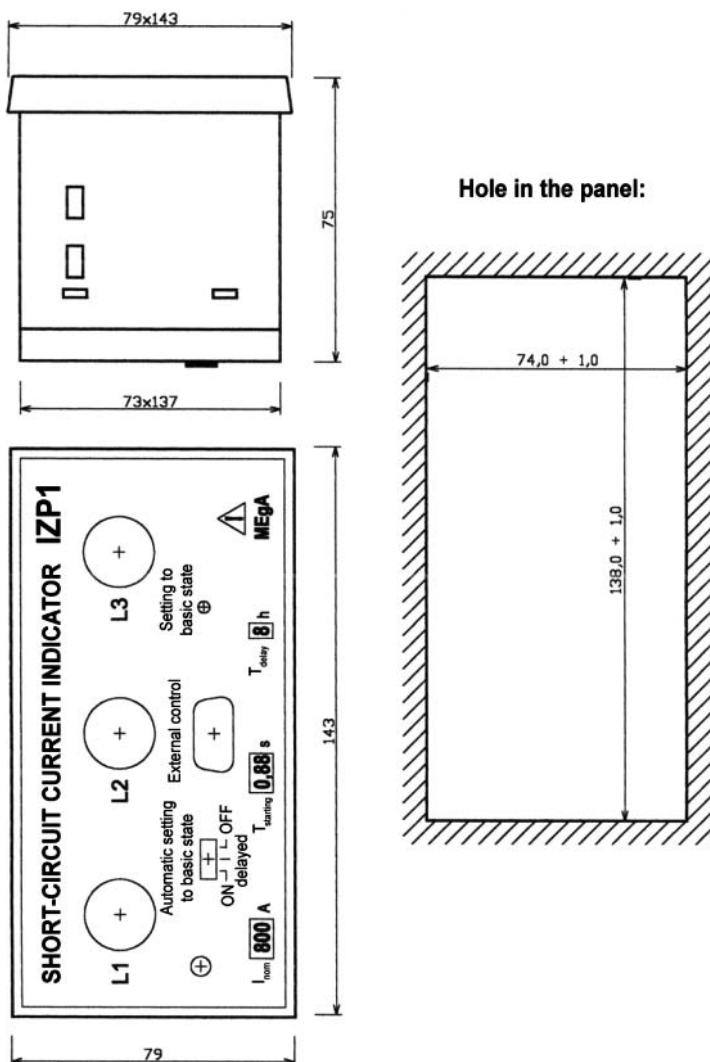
Dimensions of the IZP1 unit and of the hole for its installing into the panel
